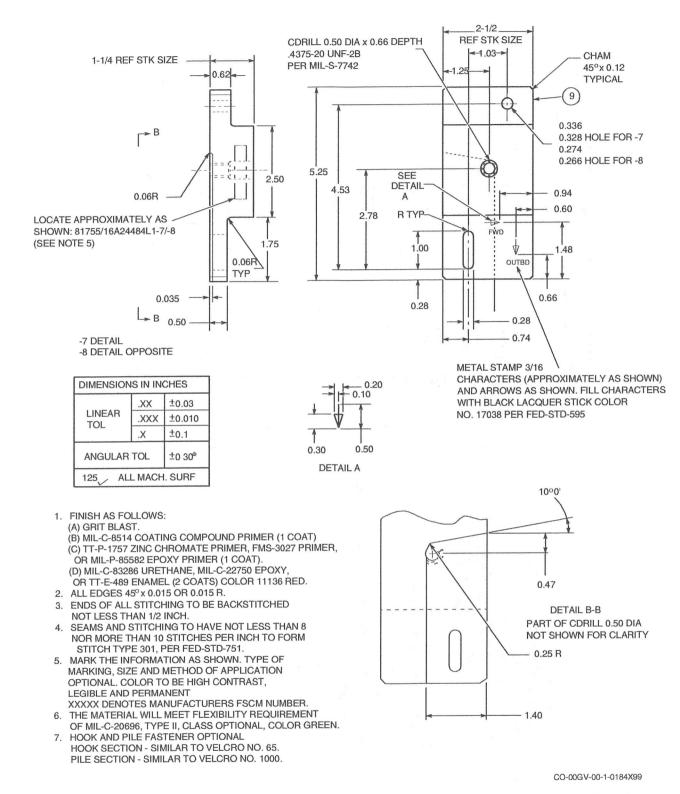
Fabrication of Adapter Kit, Jacking Longeron Removal, PN 16A24484L1-1. (Sheet 2)
